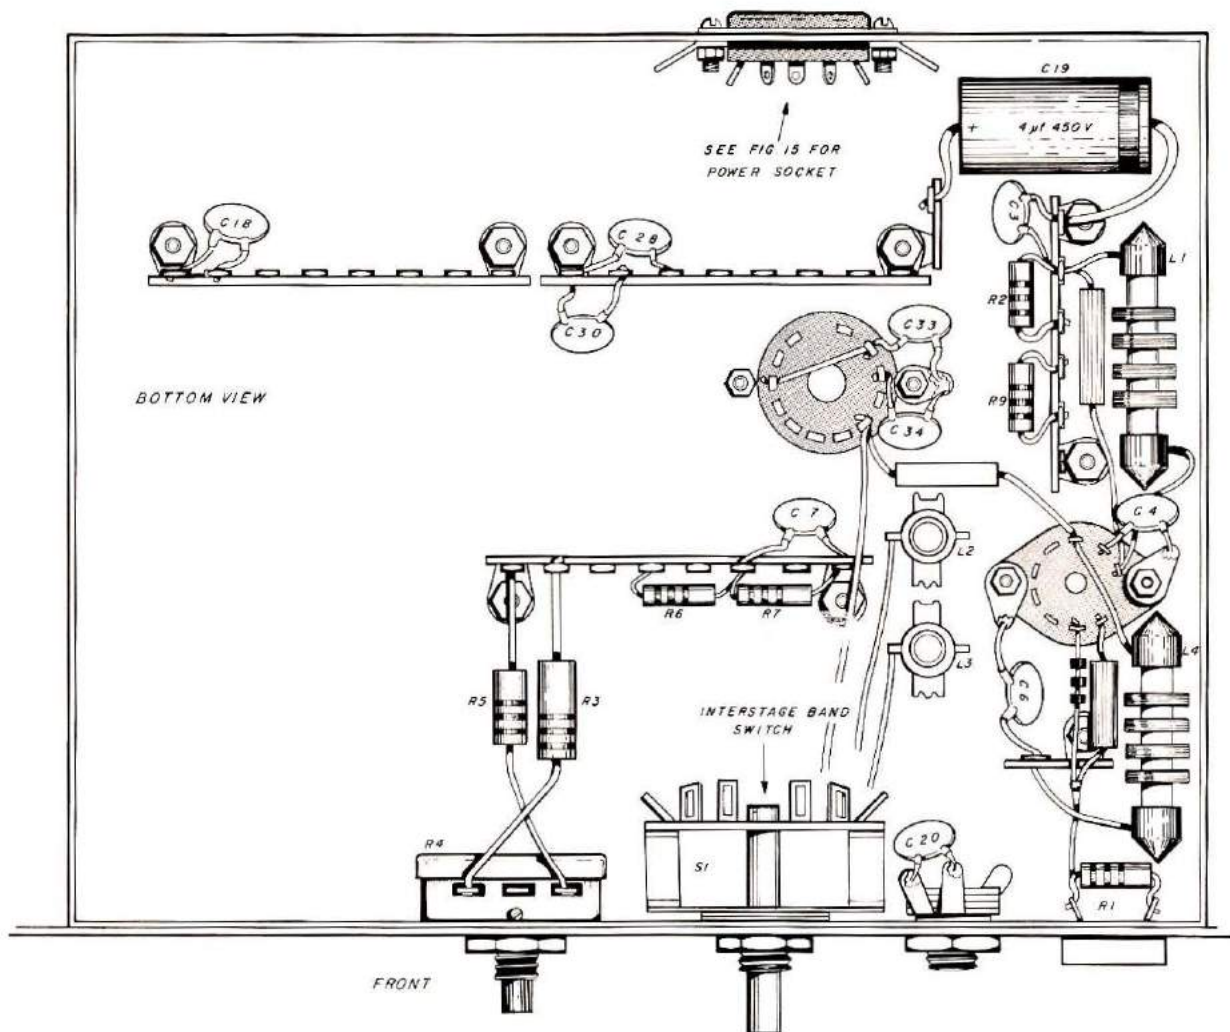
The components shown are the critical ones, which should be mounted away from the chassis and each other. Lead lengths and parts placement are very important here, so check yours against this drawing and the photographs to be sure you have it as much like the original as possible.
